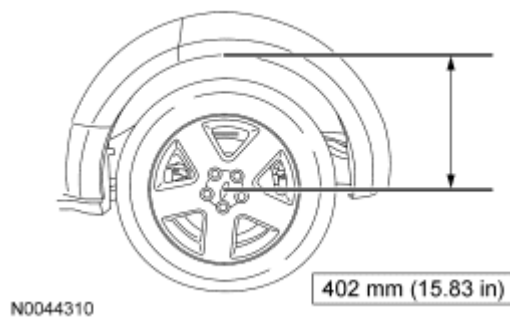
Identifying Distance Between Center Of Hub And Lip Of Fender
